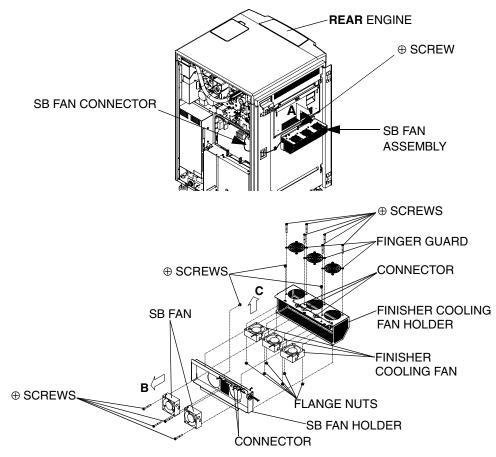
Removal of the SB Fan and the Finisher Cooling Fan (Rear Engine)
